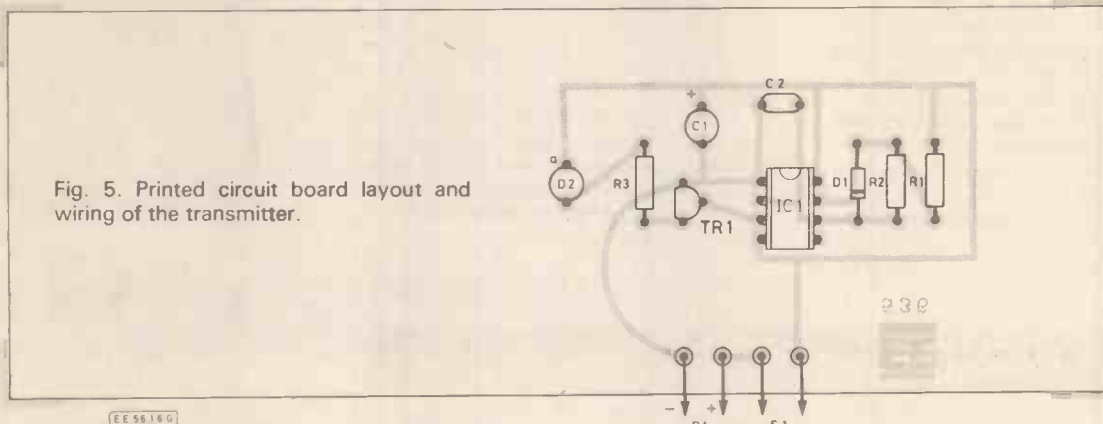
Printed circuit board layout and wiring of the transmitter.
